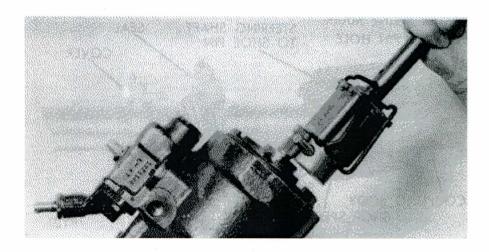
STEERING COUPLING TO GEAR ALIGNMENT
